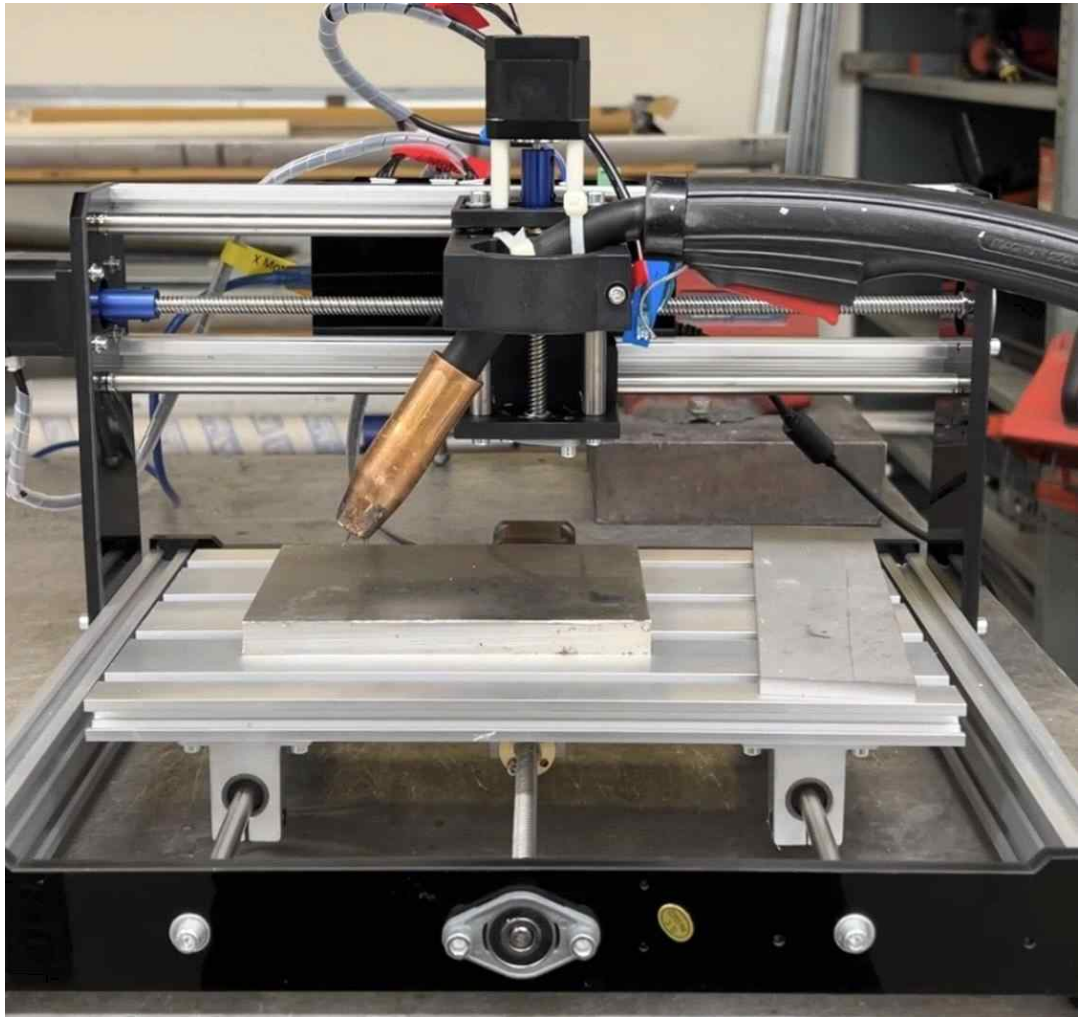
Coaxial Plate with Attached GMAW Welding Torch
